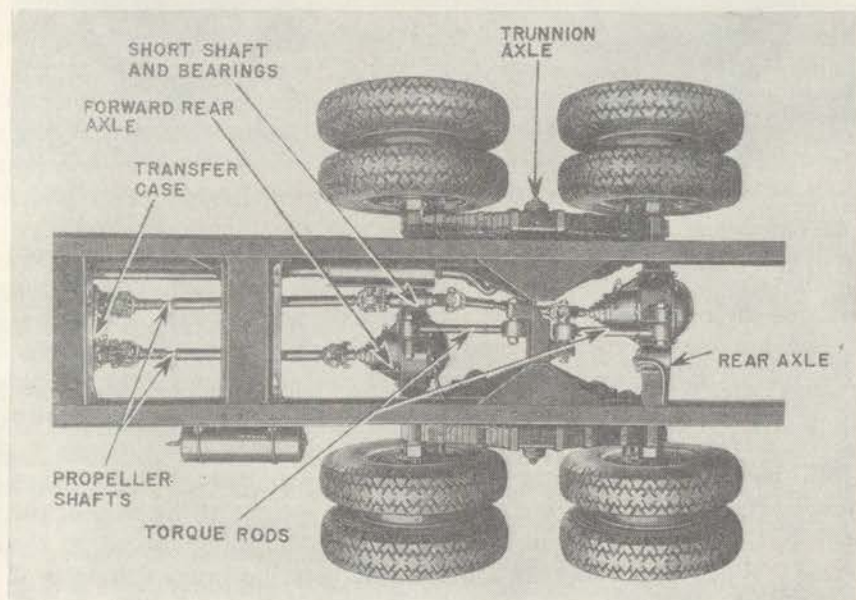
Bogie four-wheel drive with independent propeller shafts.
